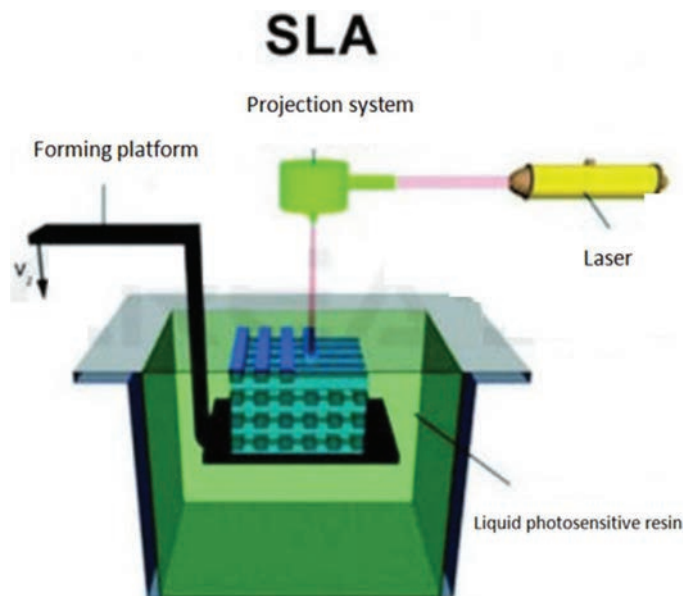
Technical process of stereo lithography appearance 3D printing technology.
